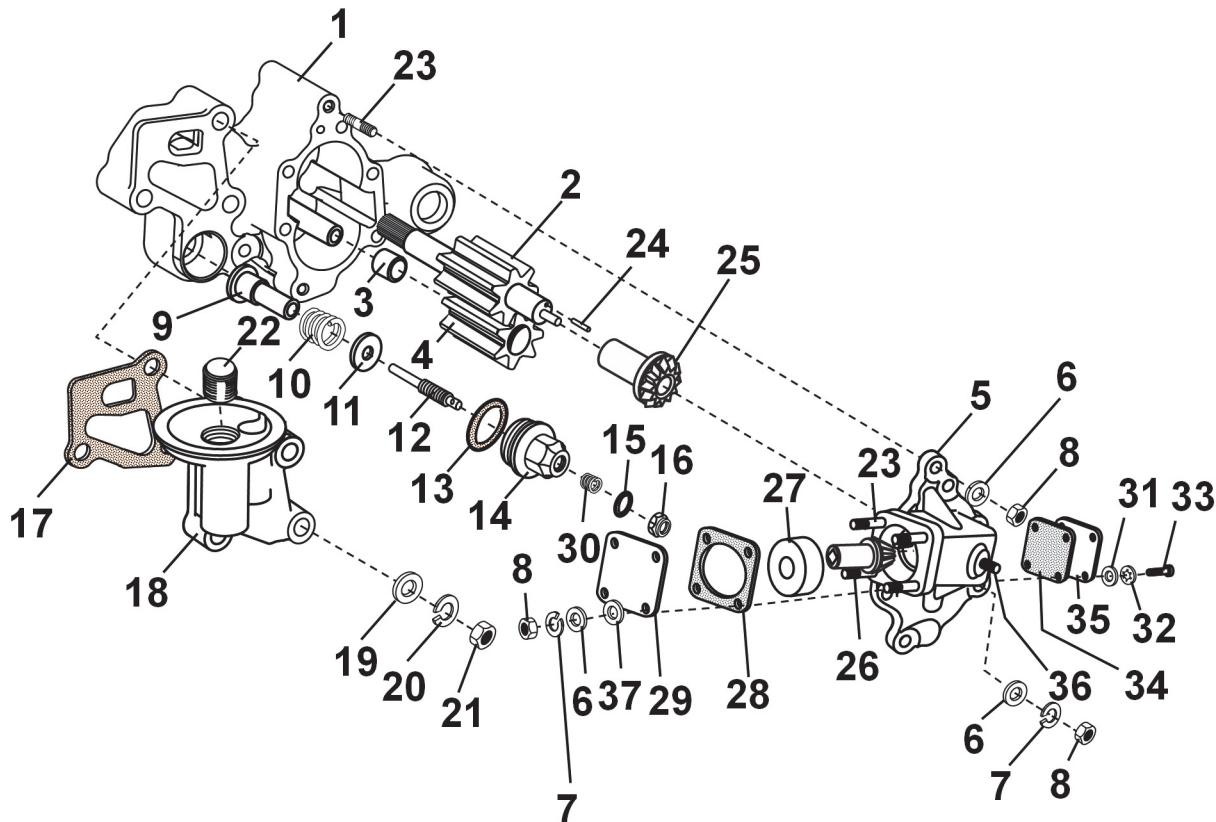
Oil Pump Assembly with Electrical Tach Drive Adapter A B C
